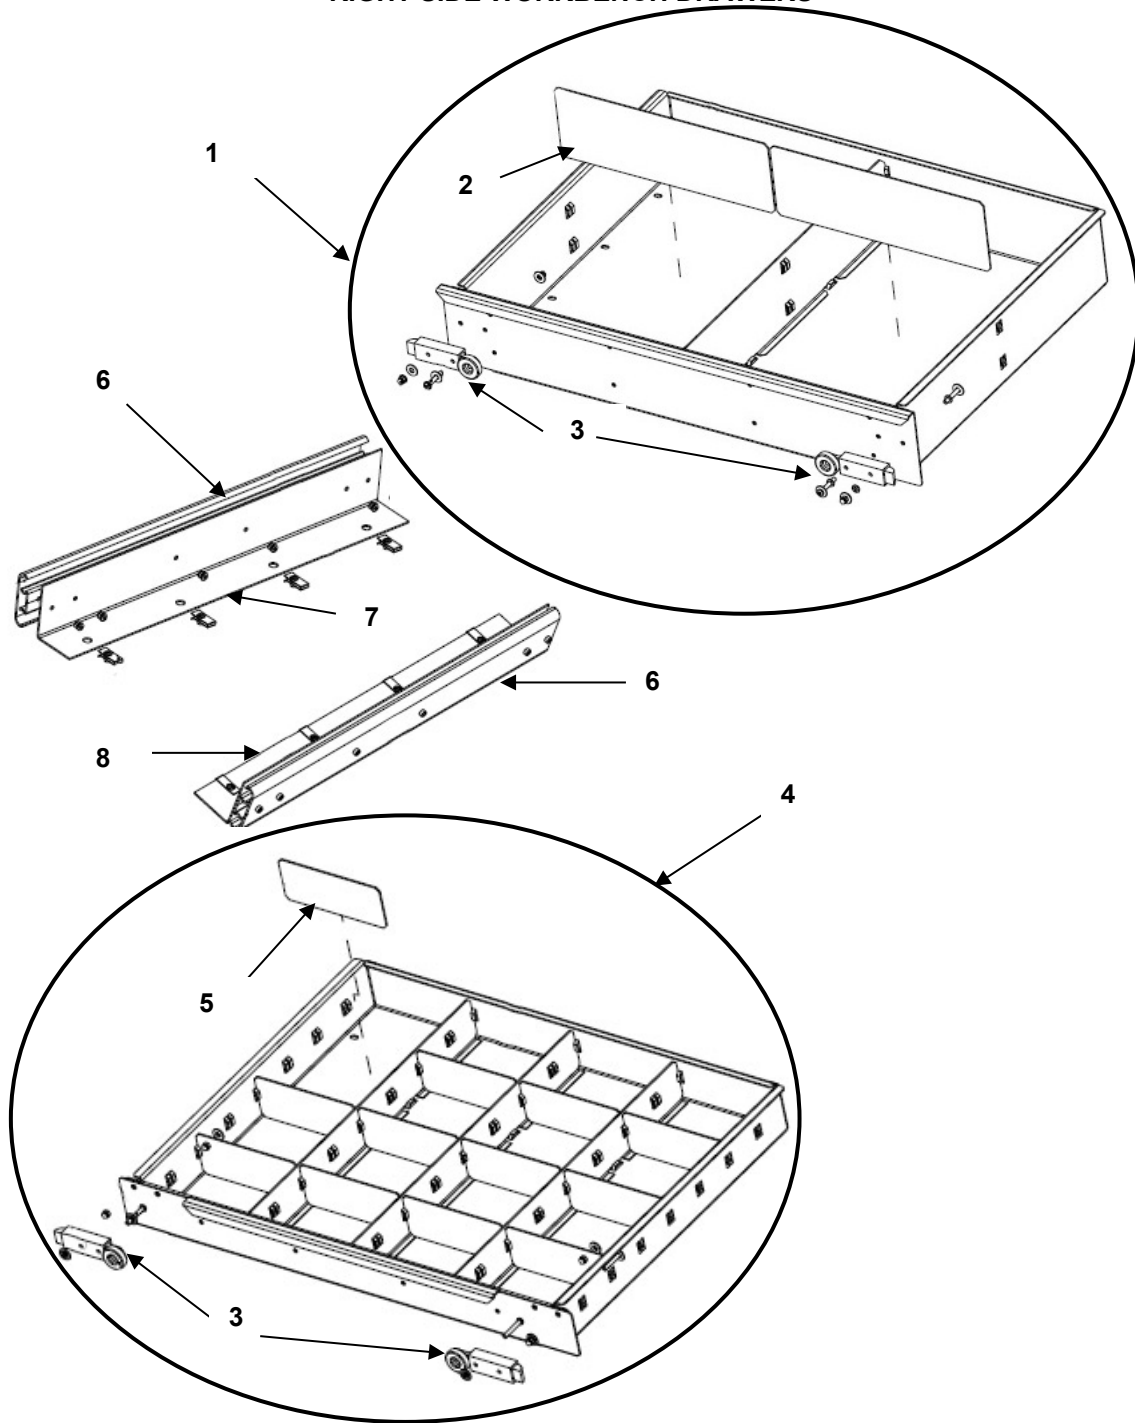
RIGHT SIDE WORKBENCH DRAWERS
